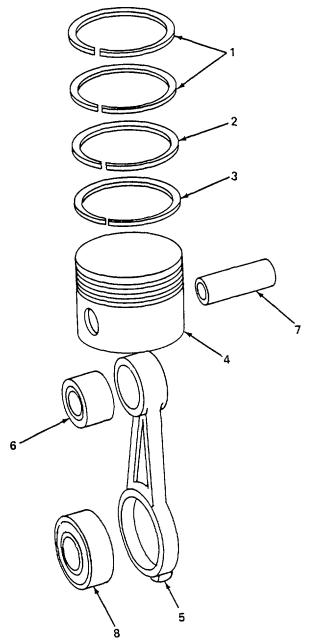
First Stage Piston and Connecting Rod Assembly, Repair.
